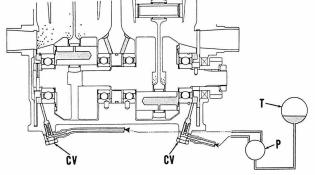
View of the oil pump synchronizing points. Refer to text for adjusting pump control cable.
